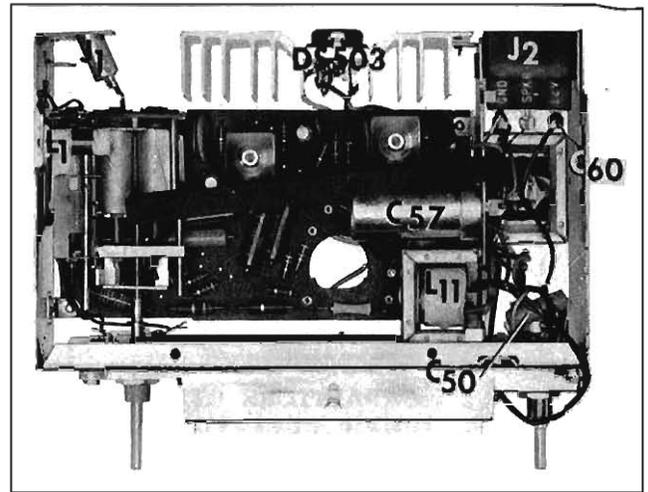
CORVAIR - PARTS LAYOUT - TUNER VIEW - 985831 - RADIO
